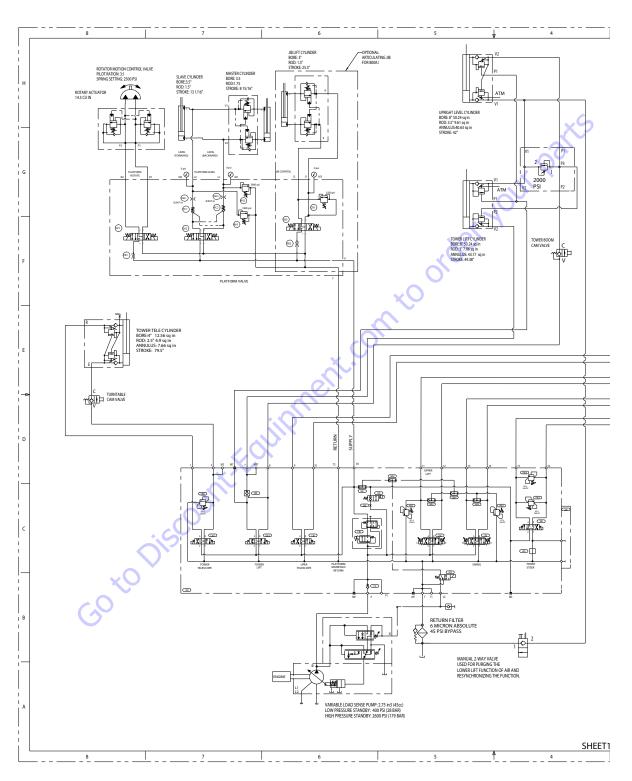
Hydraulic Schematic - Sheet 1 of 4
